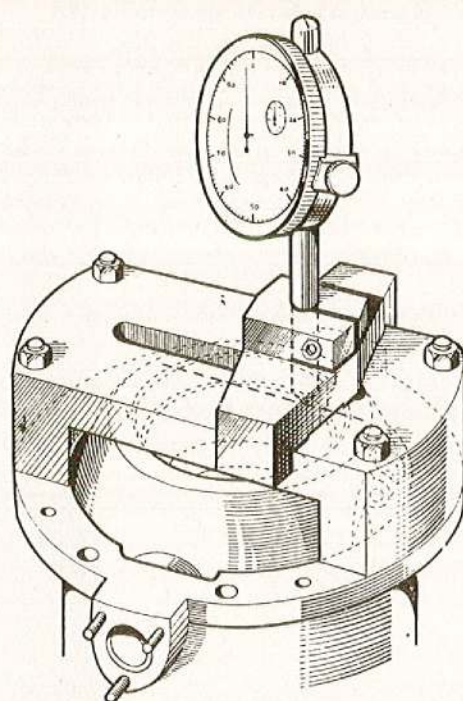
Setting control piston adjusting screw, using gauge G.51821
